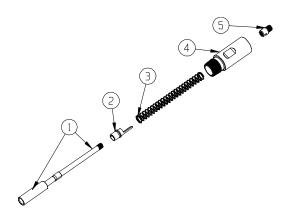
Remove Valve Stem form End Cap. 1-Vlave Stem, 2-Valve Finger, 3-Spring, 4-End Cap, 5-Thread Adapter.
